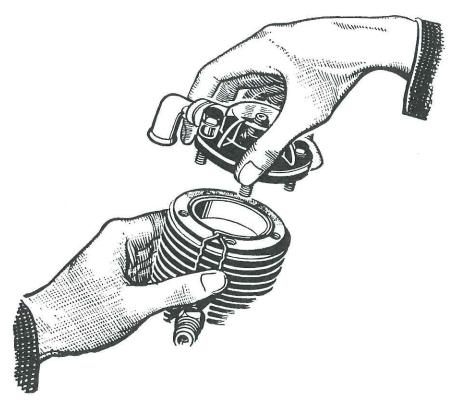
Fitting Cylinder Head Assembly. Carefully hold cylinder head and cover with fixing bolts in position, over the wire. Gently lower head on to lead wire without disturbing the loop. Tighten alternate screws.
